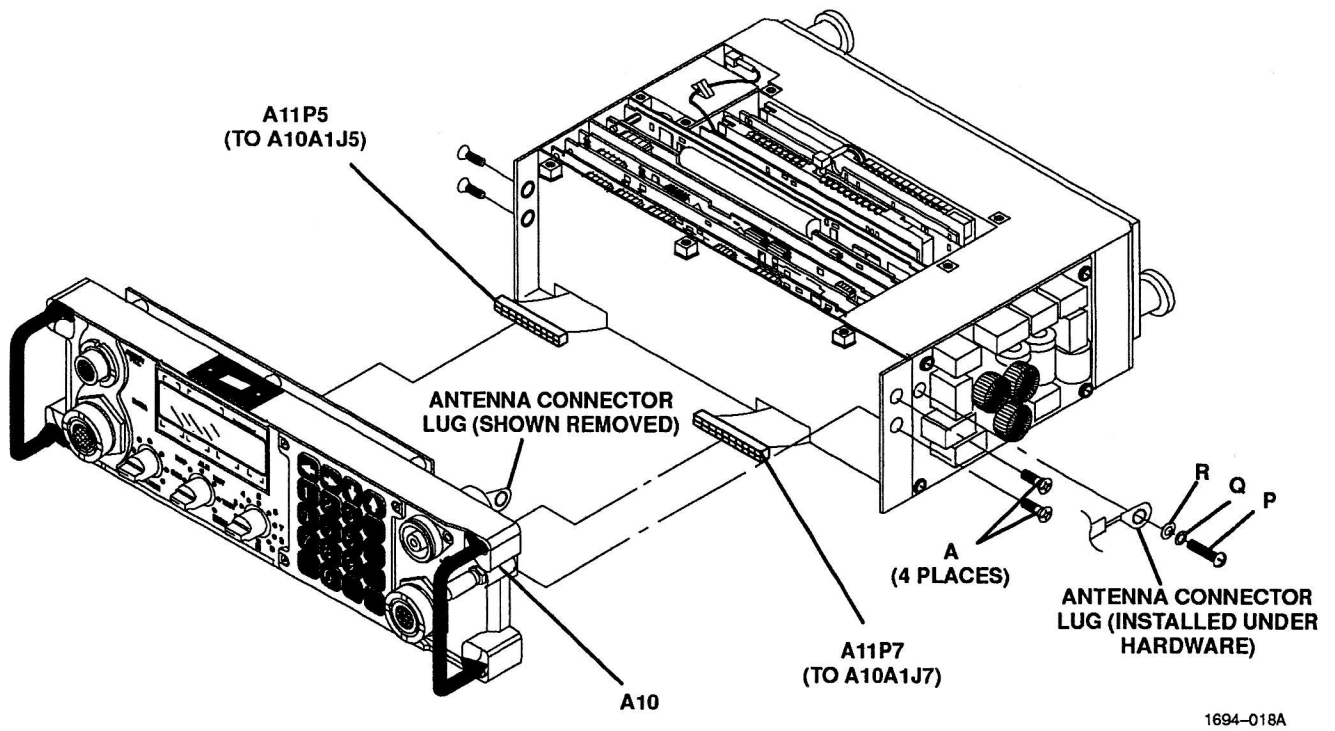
A10 Front Panel Assembly Connector and Hardware Locations
